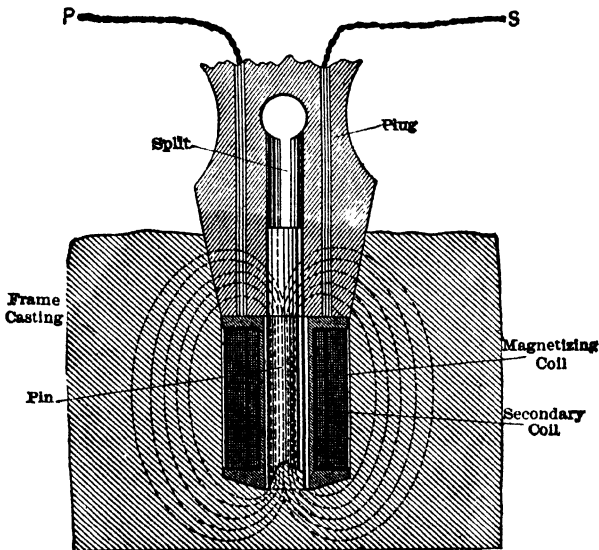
Cross-section of the Drysdale permeameter, showing the test coils and plug in the casting under test.
